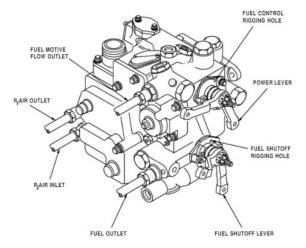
(b) Scheme of the MFCU where the fuel tube is installed
